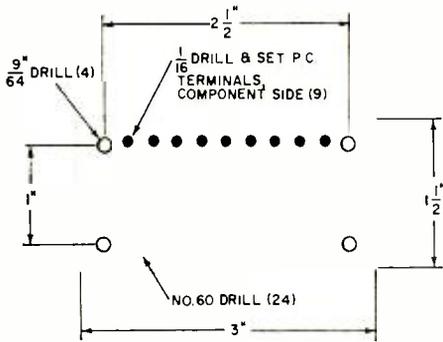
Foil side of full-size PC board (right) is drilled as shown above and components mounted as shown in Fig. 3.
